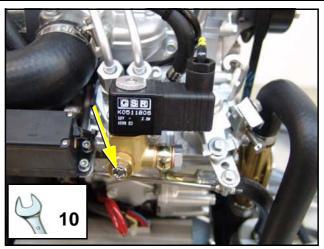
Ventilation screw at the fuel solenoid valve
